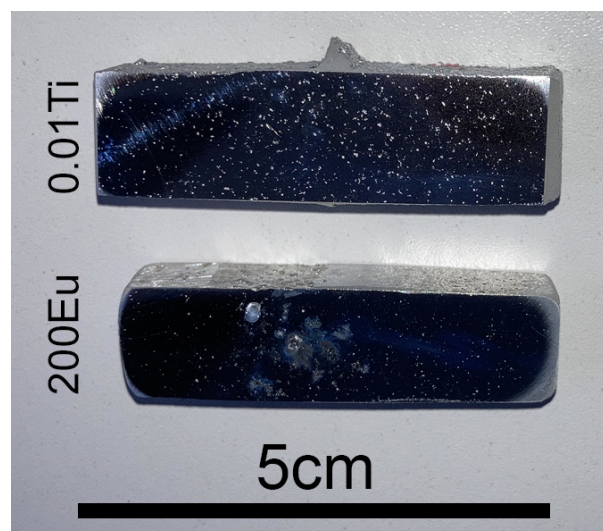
Macroporosity in 0.01Ti and 200Eu modified alloys. Samples are produced by sand casting using green sand mould.
